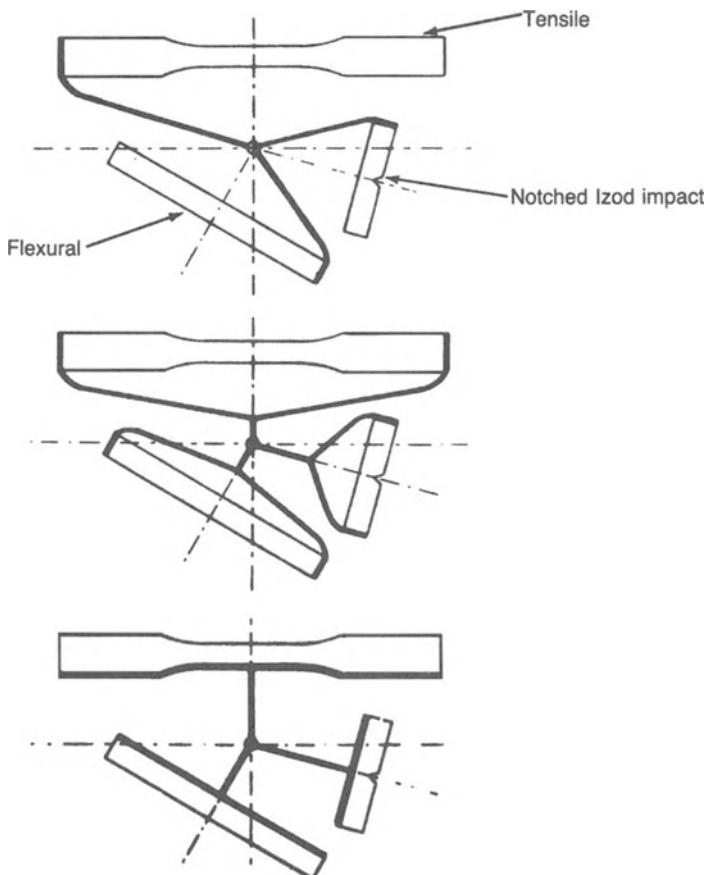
Molded test specimens that can relate to orientation and weld line based on different methods of gating (Chapter 5).
